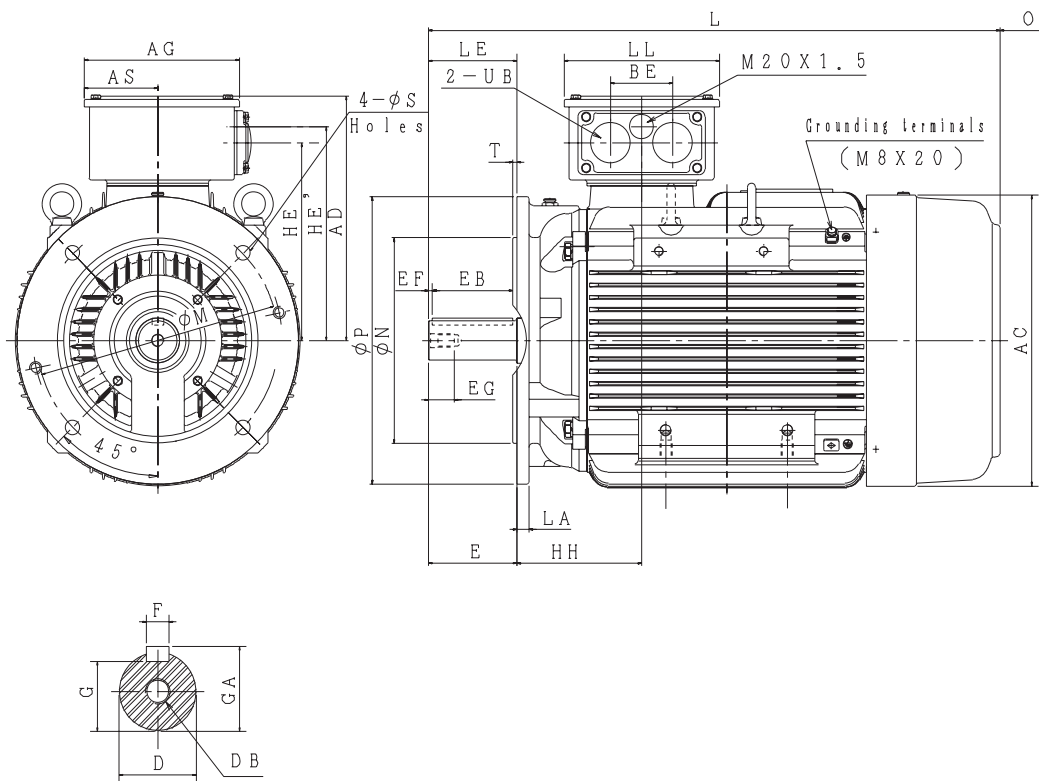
Outline drawing of cast iron design, feet version, mounting B5; frame size 250M - 200L
